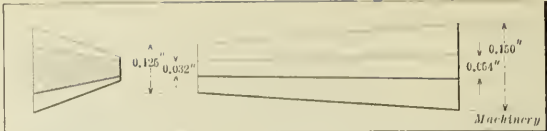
Enlarged View of Part of Bayonet between Sections A and B, Fig. 1
